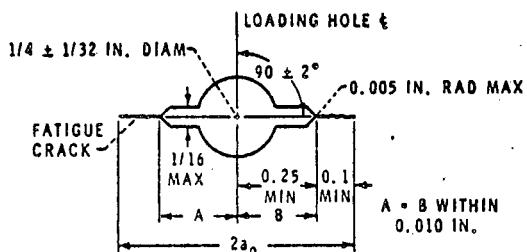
Fatigue crack starter for center-cracked plate specimens.
